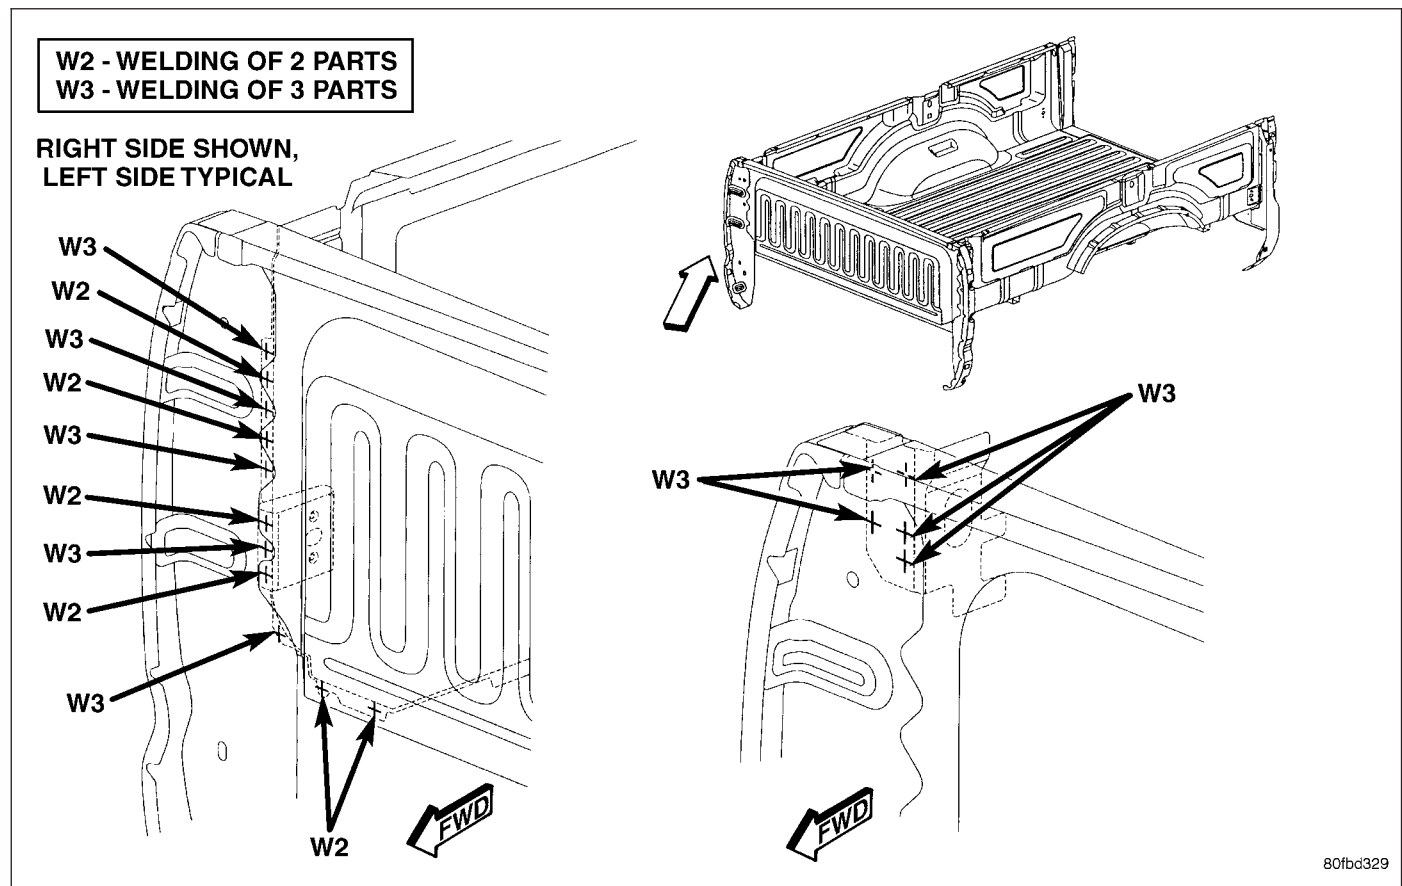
FRONT BOX SIDE PANEL - LONG CARGO BOX ONLY
